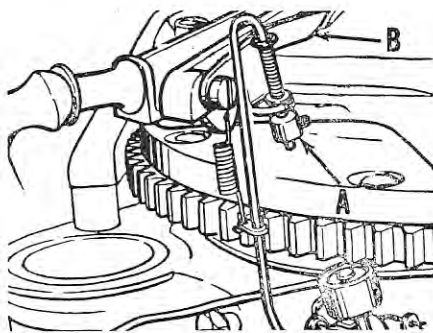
To adjust the starter latch, first set speed control grip at the fast speed recommended for starting, loosen stop collar (A) and adjust latch (B) until it just clears starter pulley lugs.
